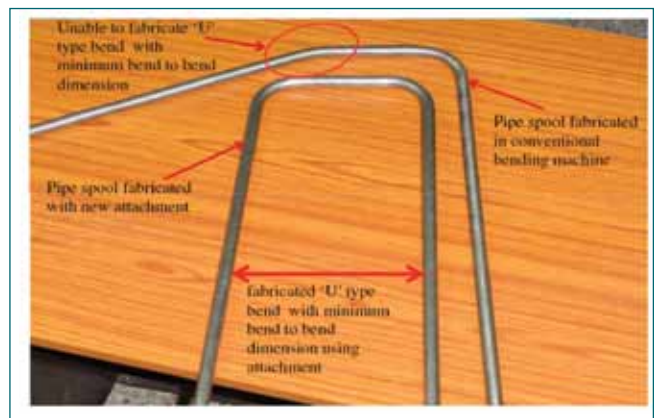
Spool fabricated with conventional machine Vs one fabricated with the attachment in the same machine
